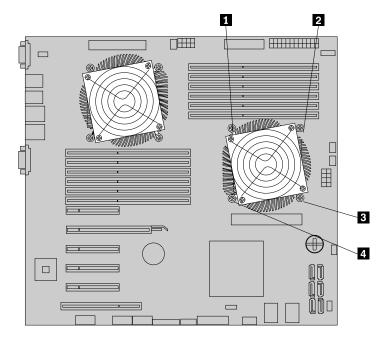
Removing the screws that secure the heat sink and fan assembly 1
